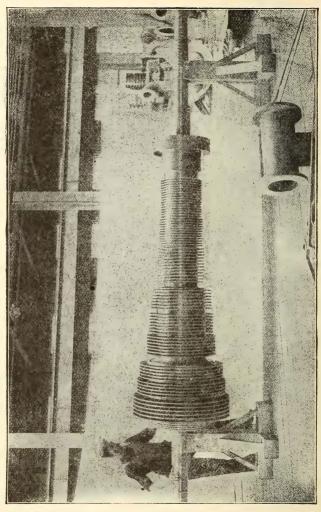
Spindle or Rotor, Allis Chalmers Steam Turbing.
